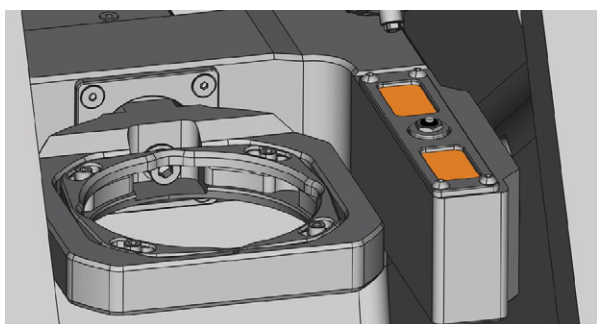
TOOL MAGAZINE IN THE WORKING CHAMBER (MARKED ORANGE)
